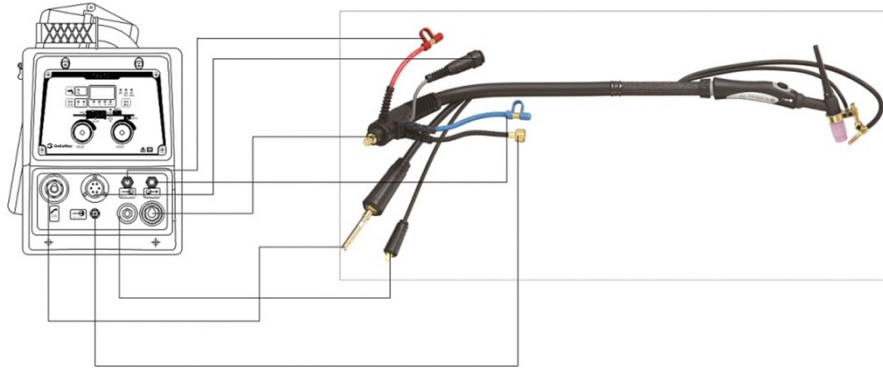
Connection and operation for gas-cooled TIG welding
